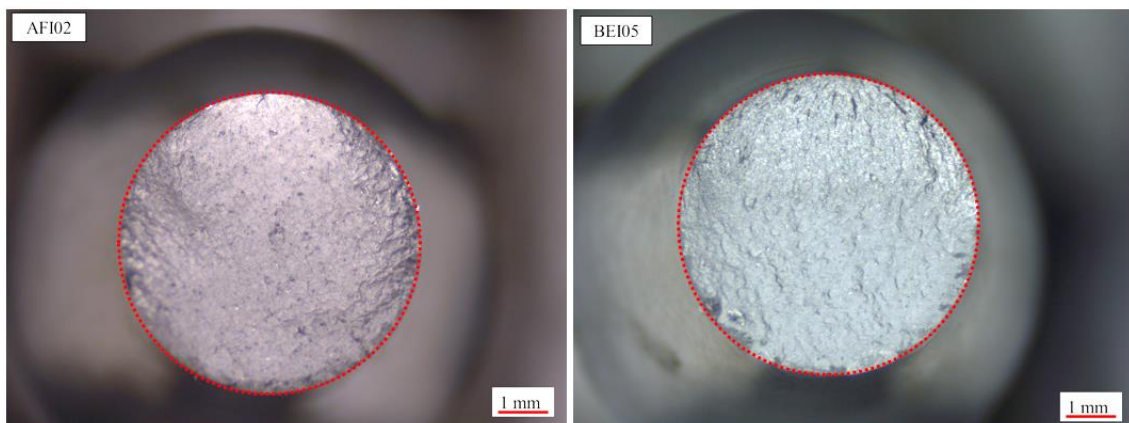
Stereoscopic images of machined specimens. Fracture surfaces of horizontally (AFI02) and slanted (BEI05) built samples.
